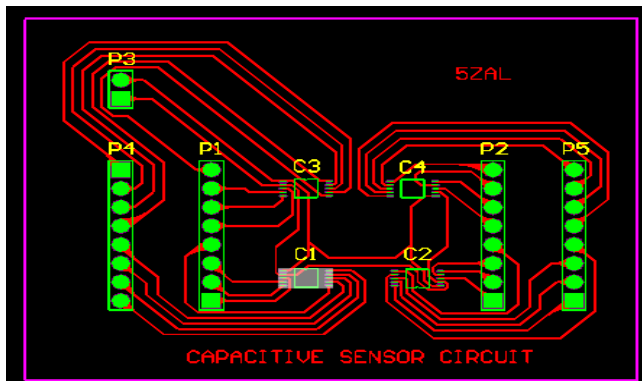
PCB layouts of the prototype on-chip droplets sensing using capacitive technique
